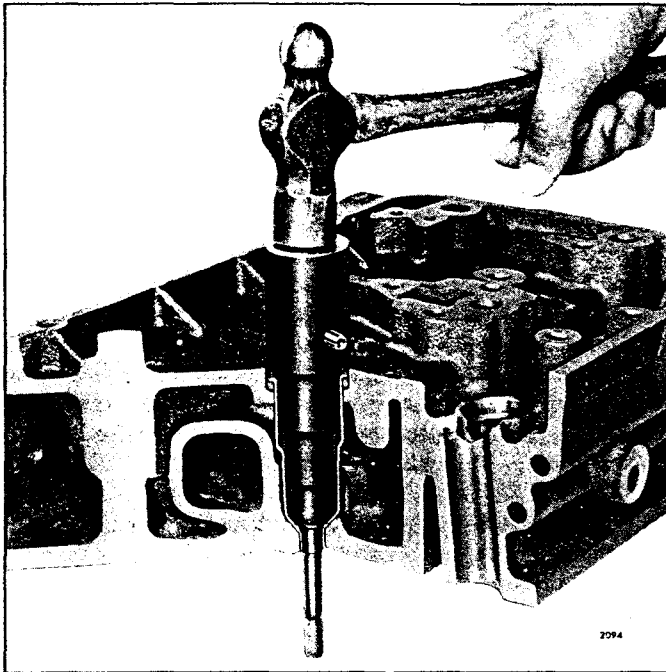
Installing Injector Tube Using Tools J 5286-4A and J 5286-5
